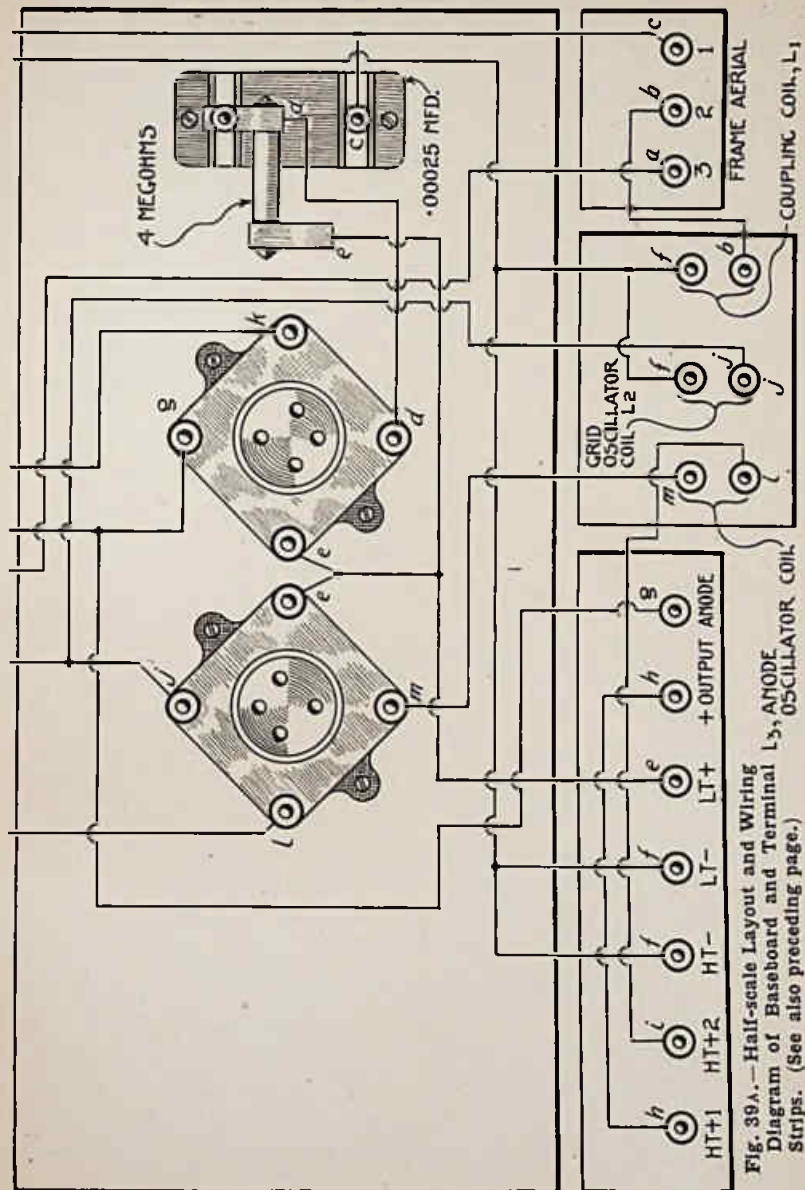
A.—Half-scale Layout and Wiring Diagram of Baseboard and Terminal Strips. (See also preceding page.)
